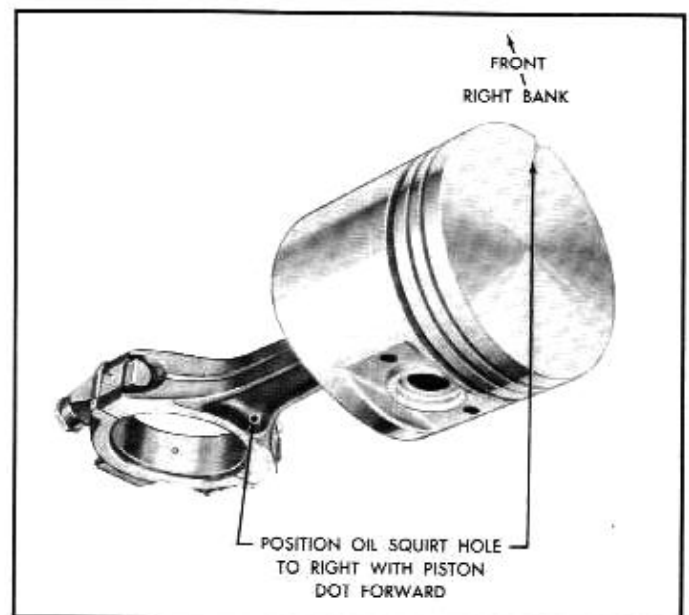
C-145—Position of Piston and Connecting Rod Squirt Hole — Right Bank — Typical
